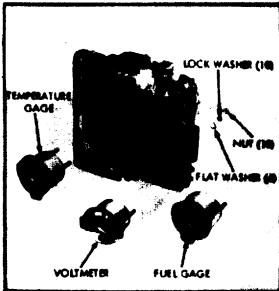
Disassembly/assembly - driver's indicator panel assembly (1 of 3).
